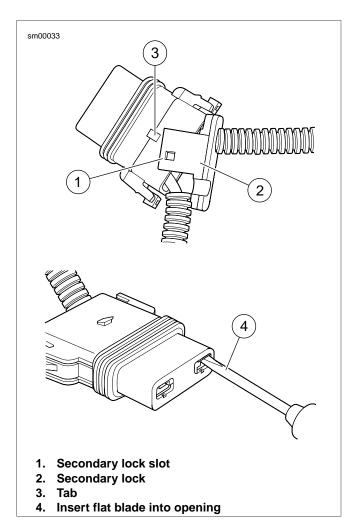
Delphi Maxi-Fuse Housing: Remove Socket Terminals
